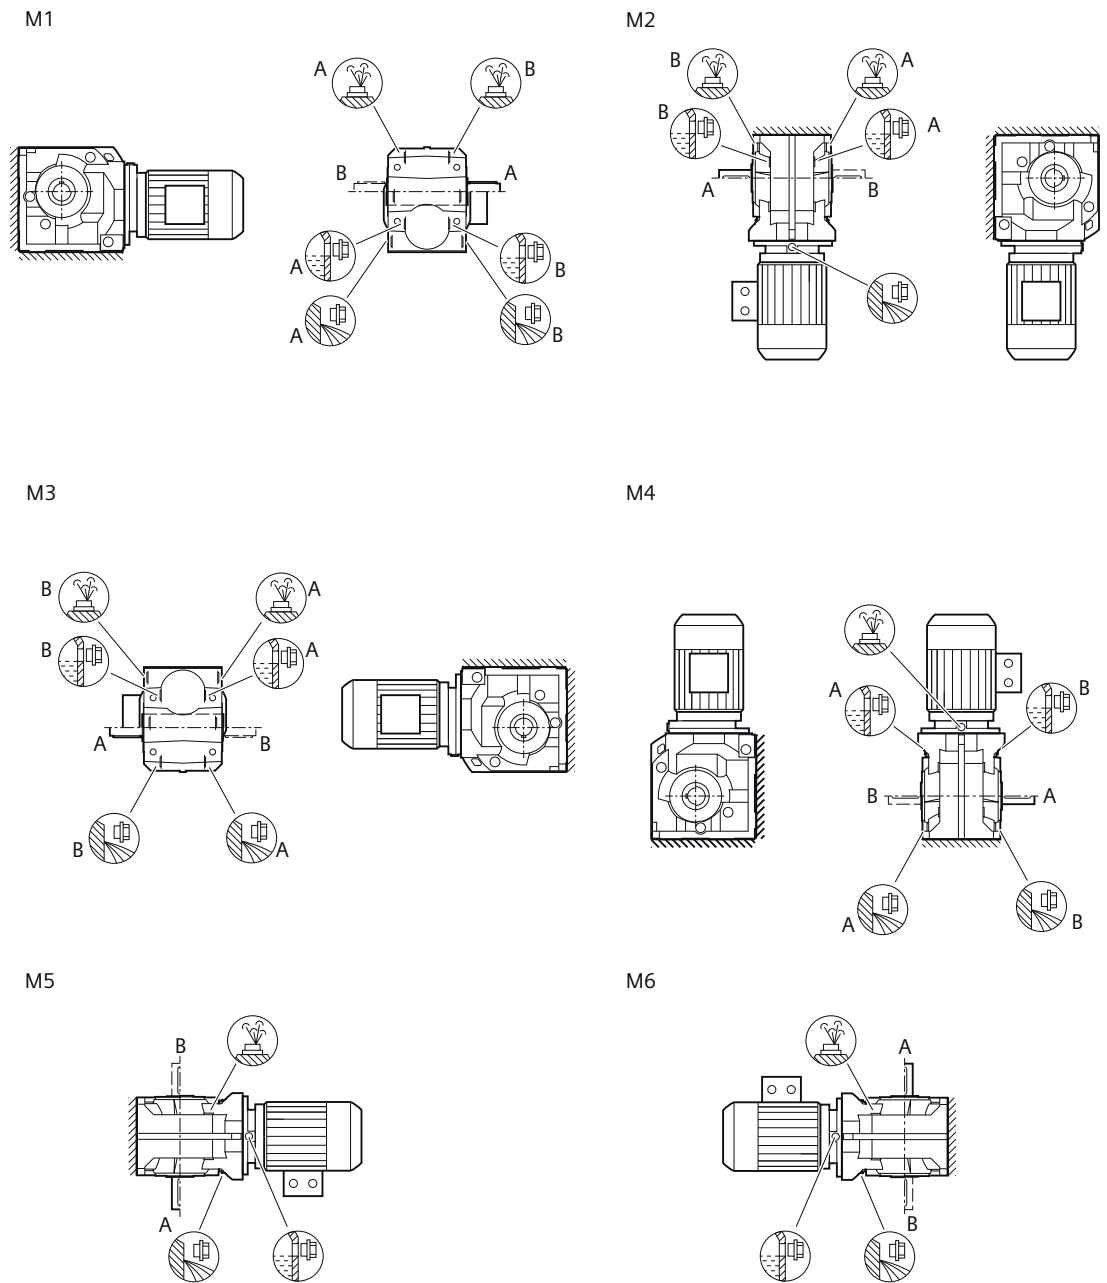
Mounting positions for helical worm gearbox C. foot-mounted design, sizes 39 - 89
